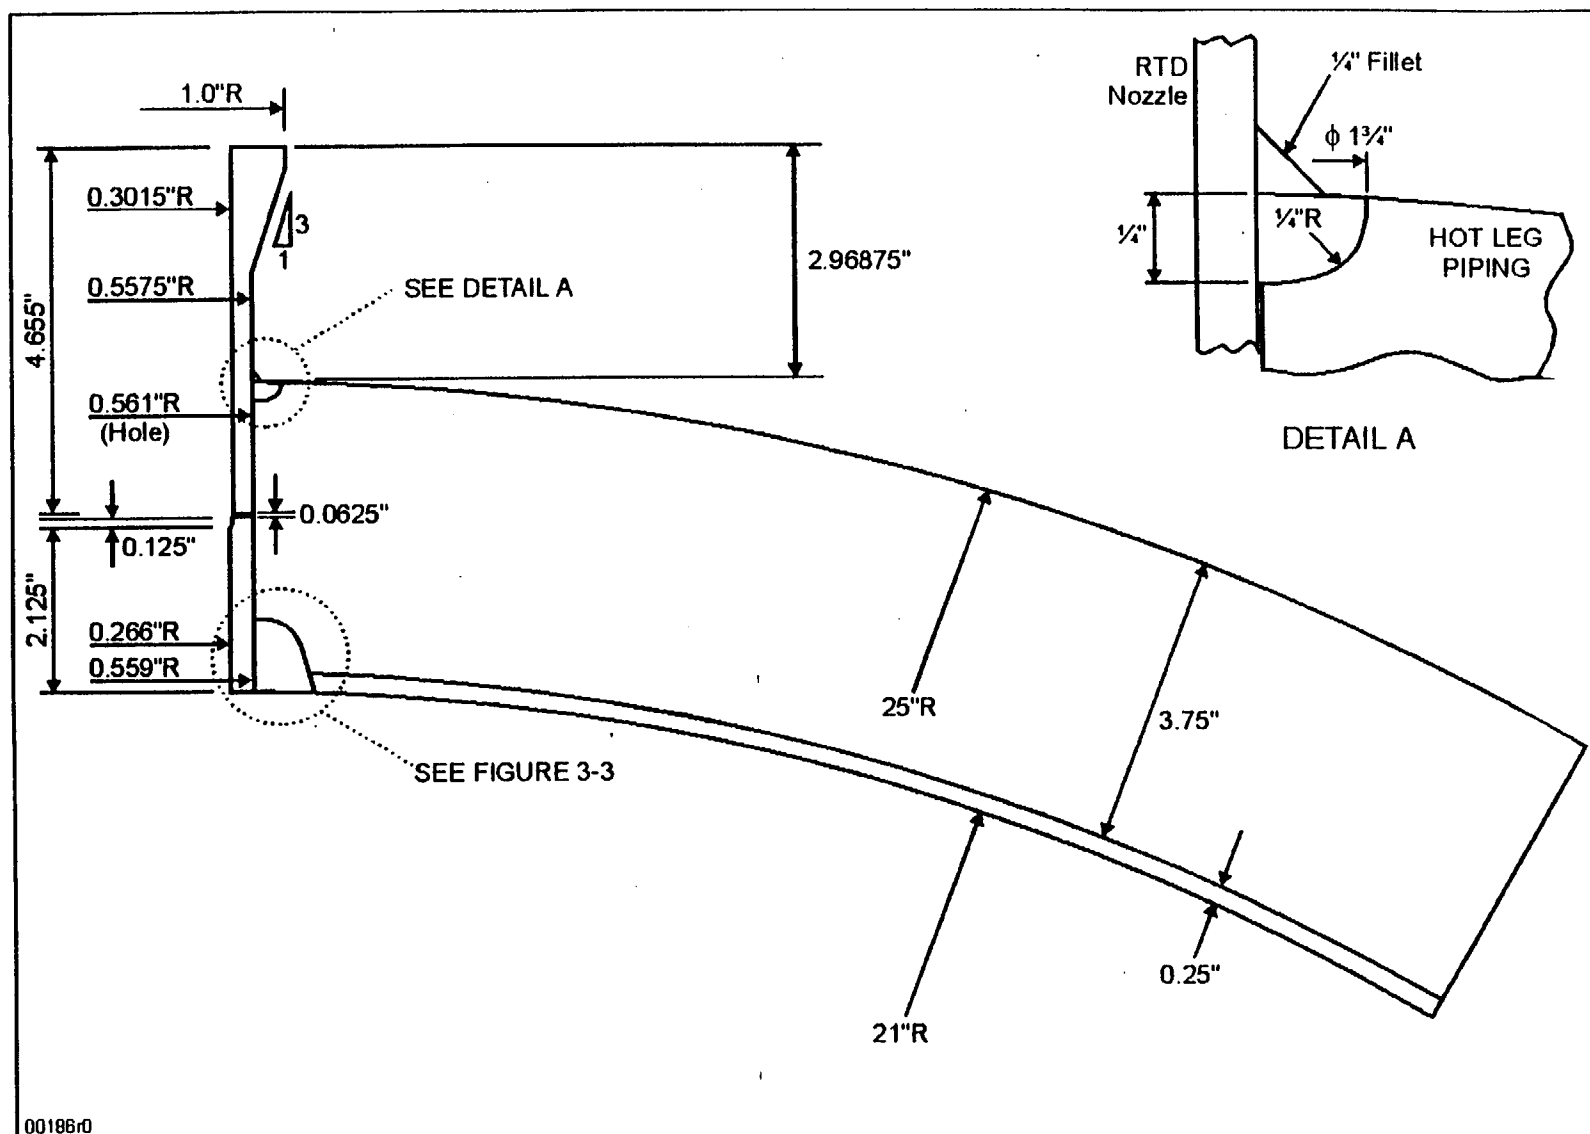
Geometry and Dimensions of Hot Leg Pipe RTD Nozzle Penetration, General View
